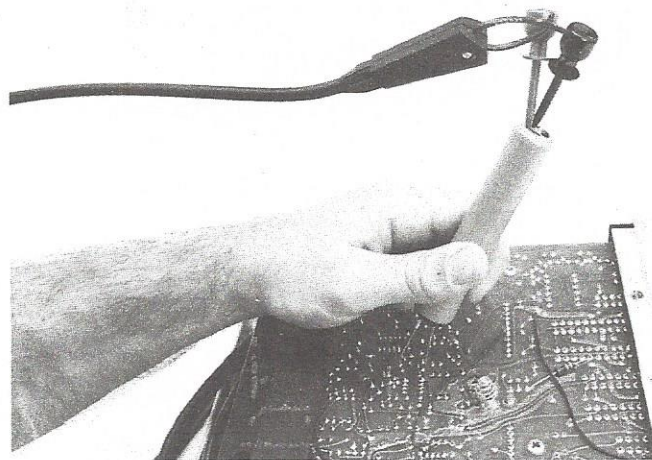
The optional Touch Test Probe can be used with the "PORTA-Z" to check the inductance and ringing of coils that are mounted flat on the PC board.
